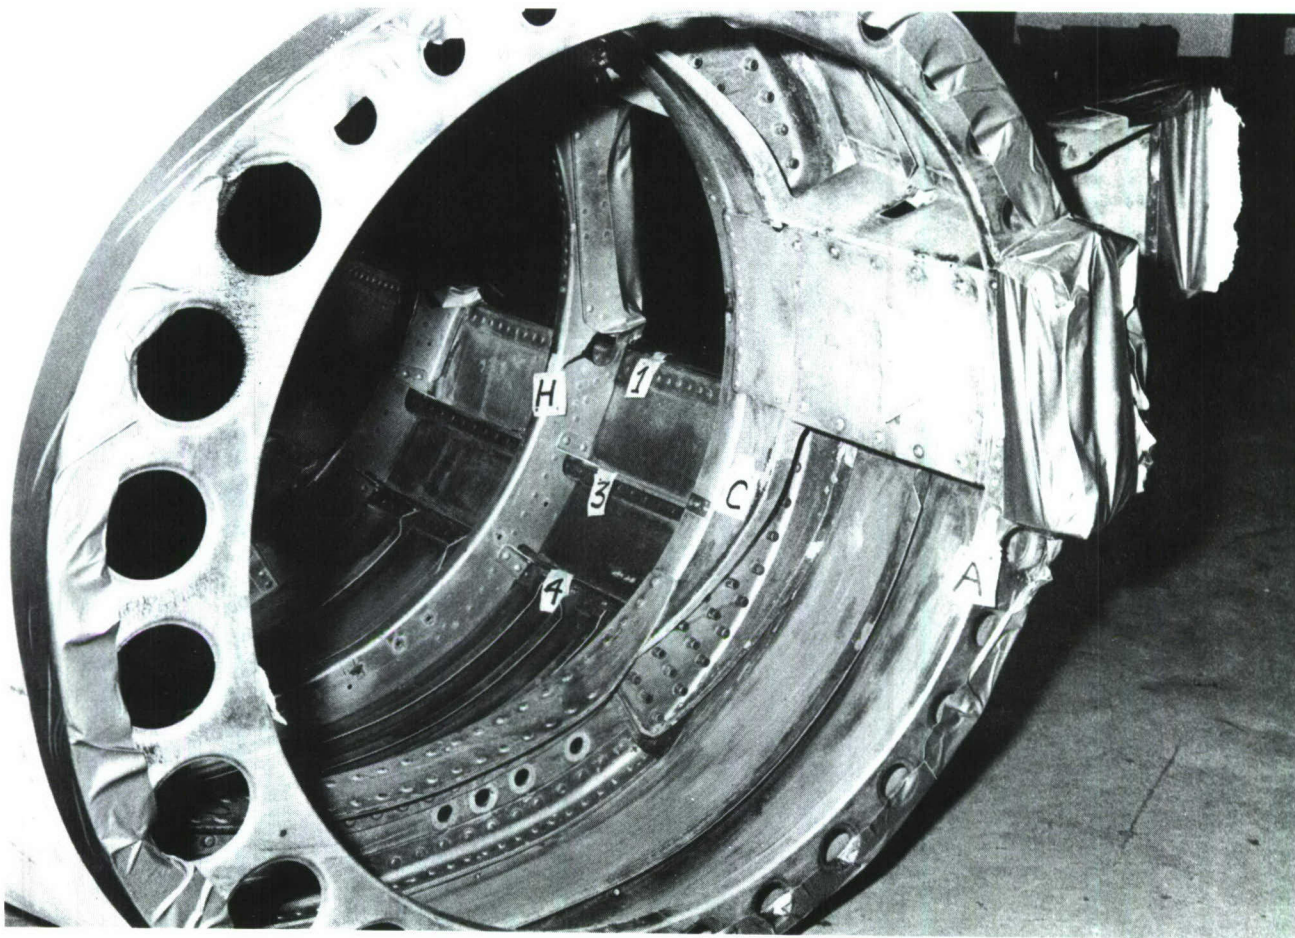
Rear View of Prepared Test Fuselage Showing Construction Details
